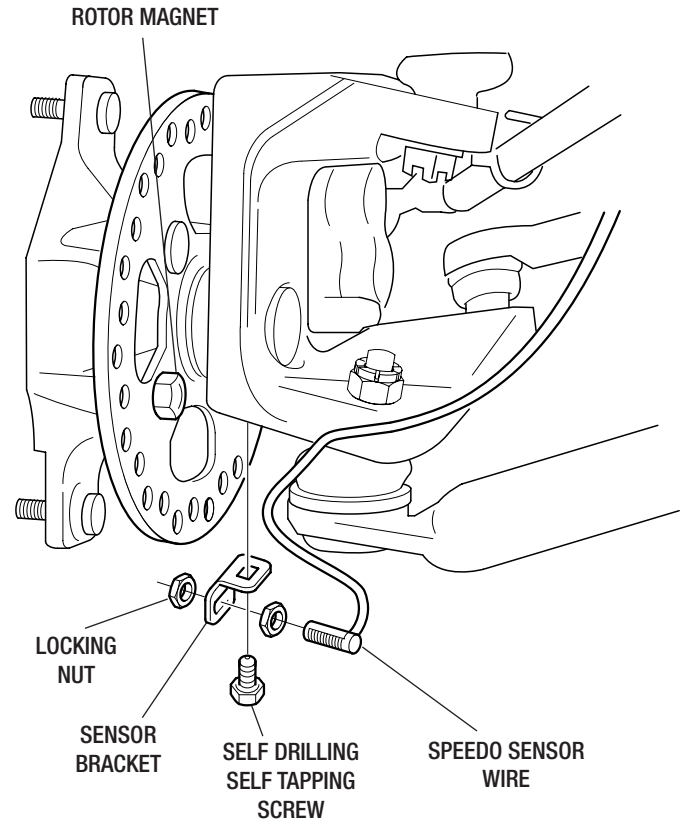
Speedo wire and sensor bracket mounting on inside of front wheel
